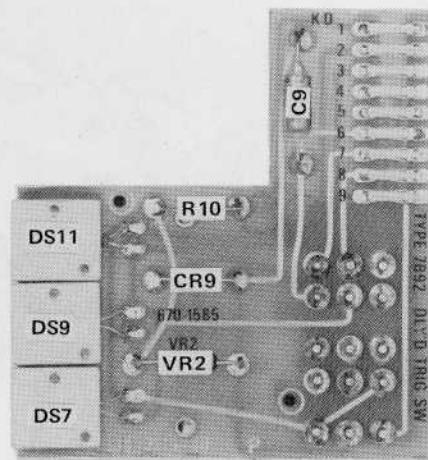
Delayed Trigger Switch circuit board A4.
